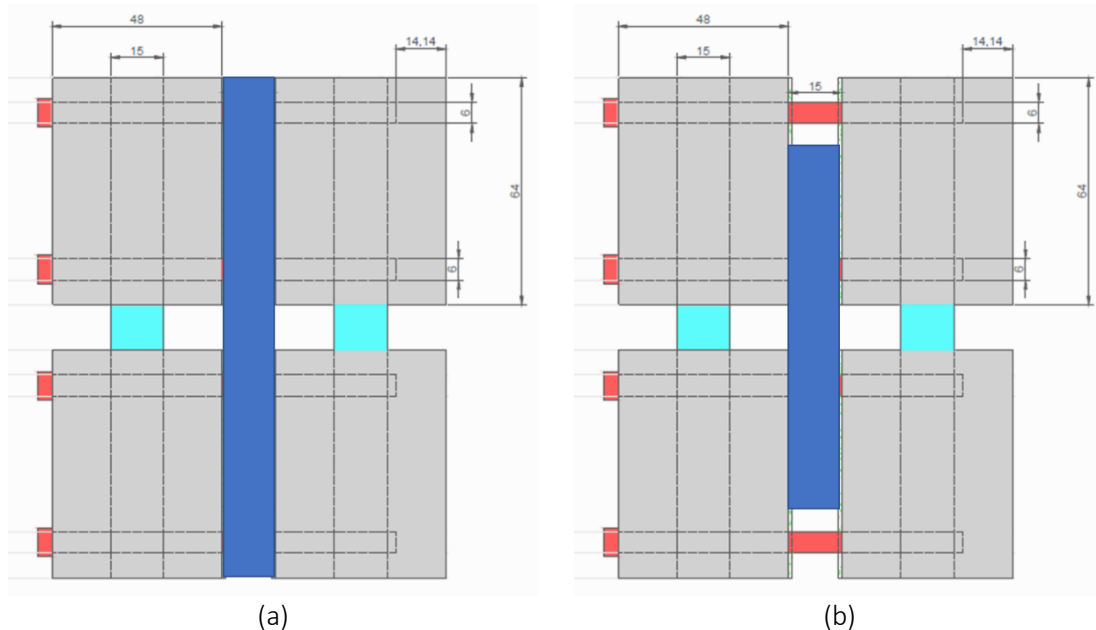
Schematic of CLC specimen geometries (side view of test fixture): (a) longitudinal specimen in accordance to D6641/D6641M – 09 [3.6]; (b) shorter transverse specimen, loaded only through the shear induced by the test rig.
